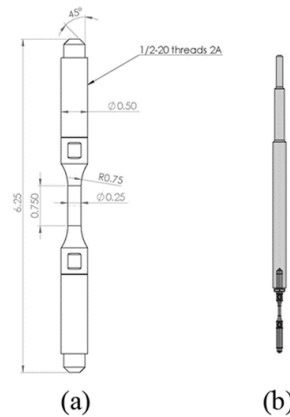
(a) Geometry and dimensions (in inches) of the fatigue specimen. (b) Schematic of the specimen pull-rod assembly.
